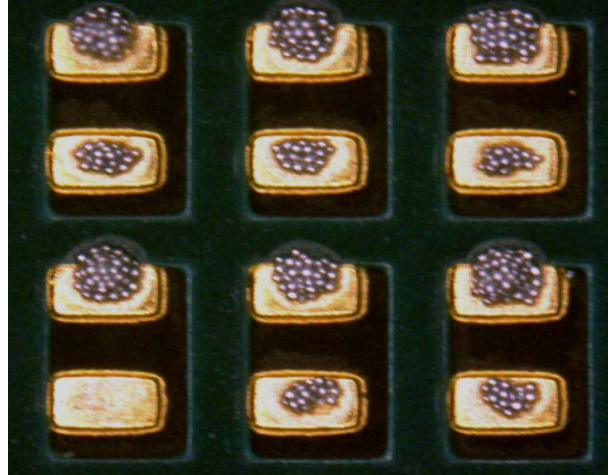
Solder deposition on 1005 pad with square aperture. Paste type 4 and 4mil stencil.
